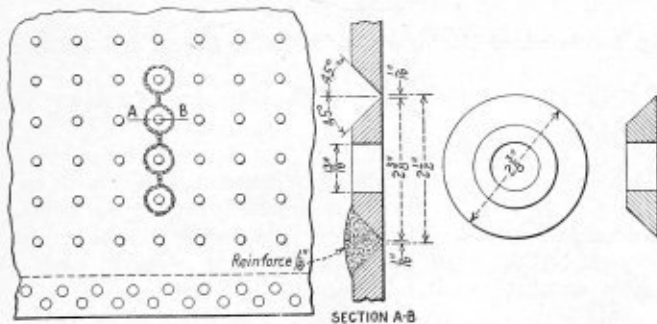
Method of Welding Cracks Through Staybolt Rows; Gas
